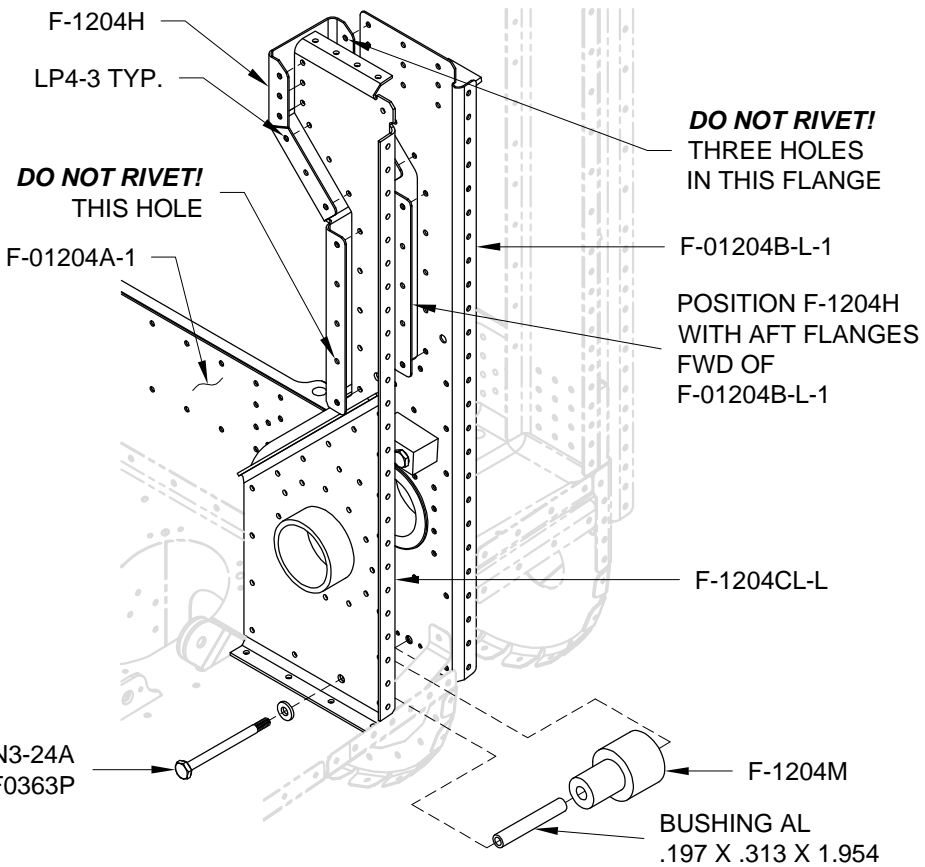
INSTALLING F-1204H & F-1204M ON LEFT SIDE
